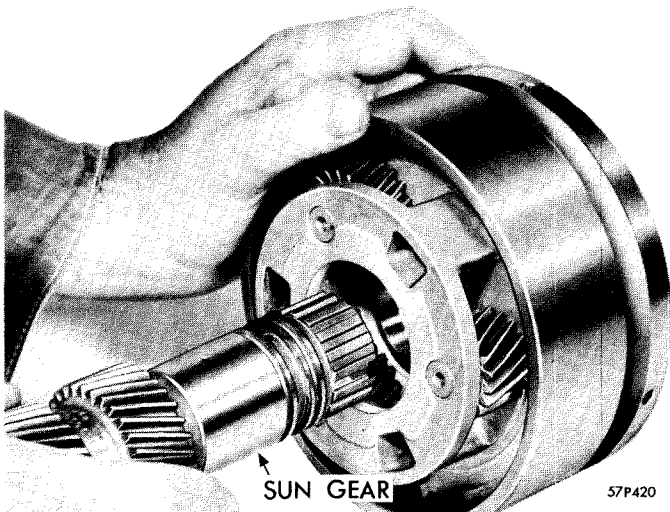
Removal and Installation of Sun Gear (Reverse Planet Pinion Carrier and Overrunning Clutch Assembly)
